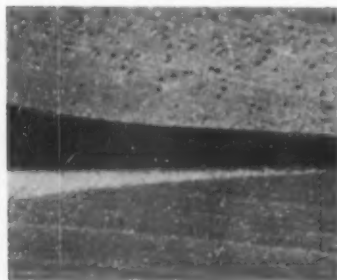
Section of coating on vinyl insulated wire showing porosity in sample extruded without using a vacuum (top) and with vacuum (bottom). Magnification of photograph is 11.5X.
